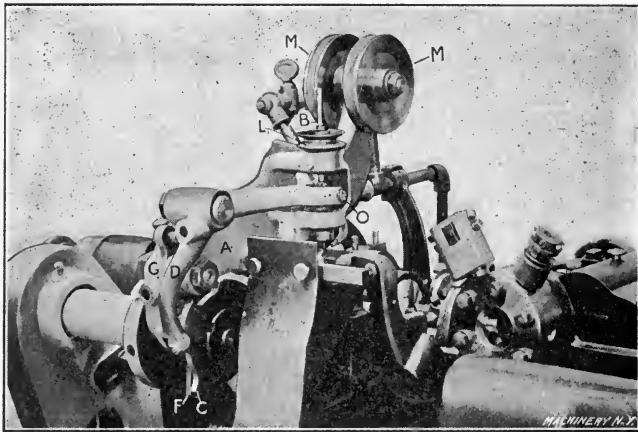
Index Drilling Attachment on a Brown & Sharpe Automatic Screw Machine
